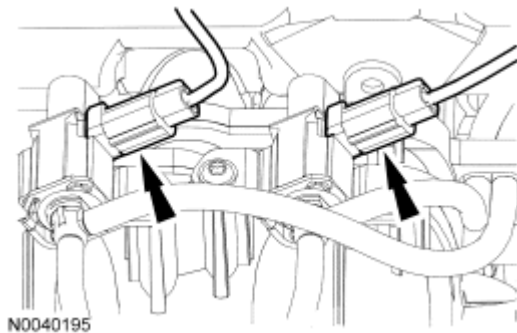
Locating Swirl Control Valve Electrical Connectors
